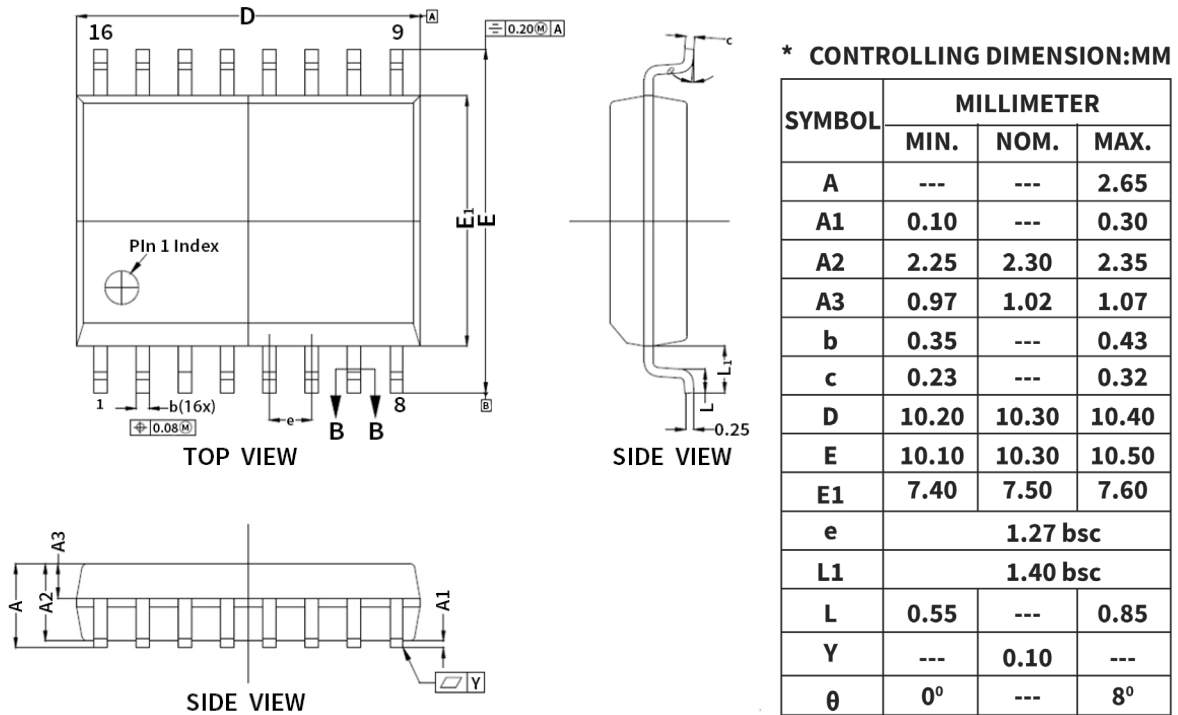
SOP16(300mil) Package Shape and Dimension in millimeters
